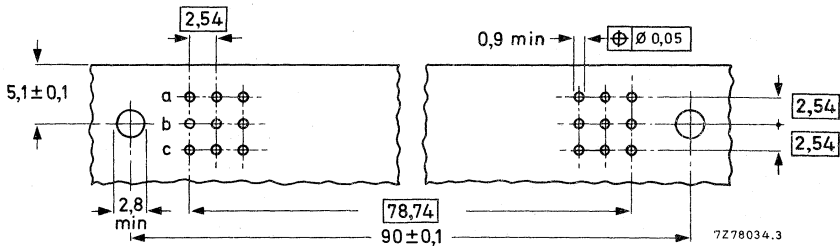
Hole pattern of the board for a female part with 3 x 32 contacts (style C): for 2 x 32 contacts (style B) the holes of row c are omitted.
